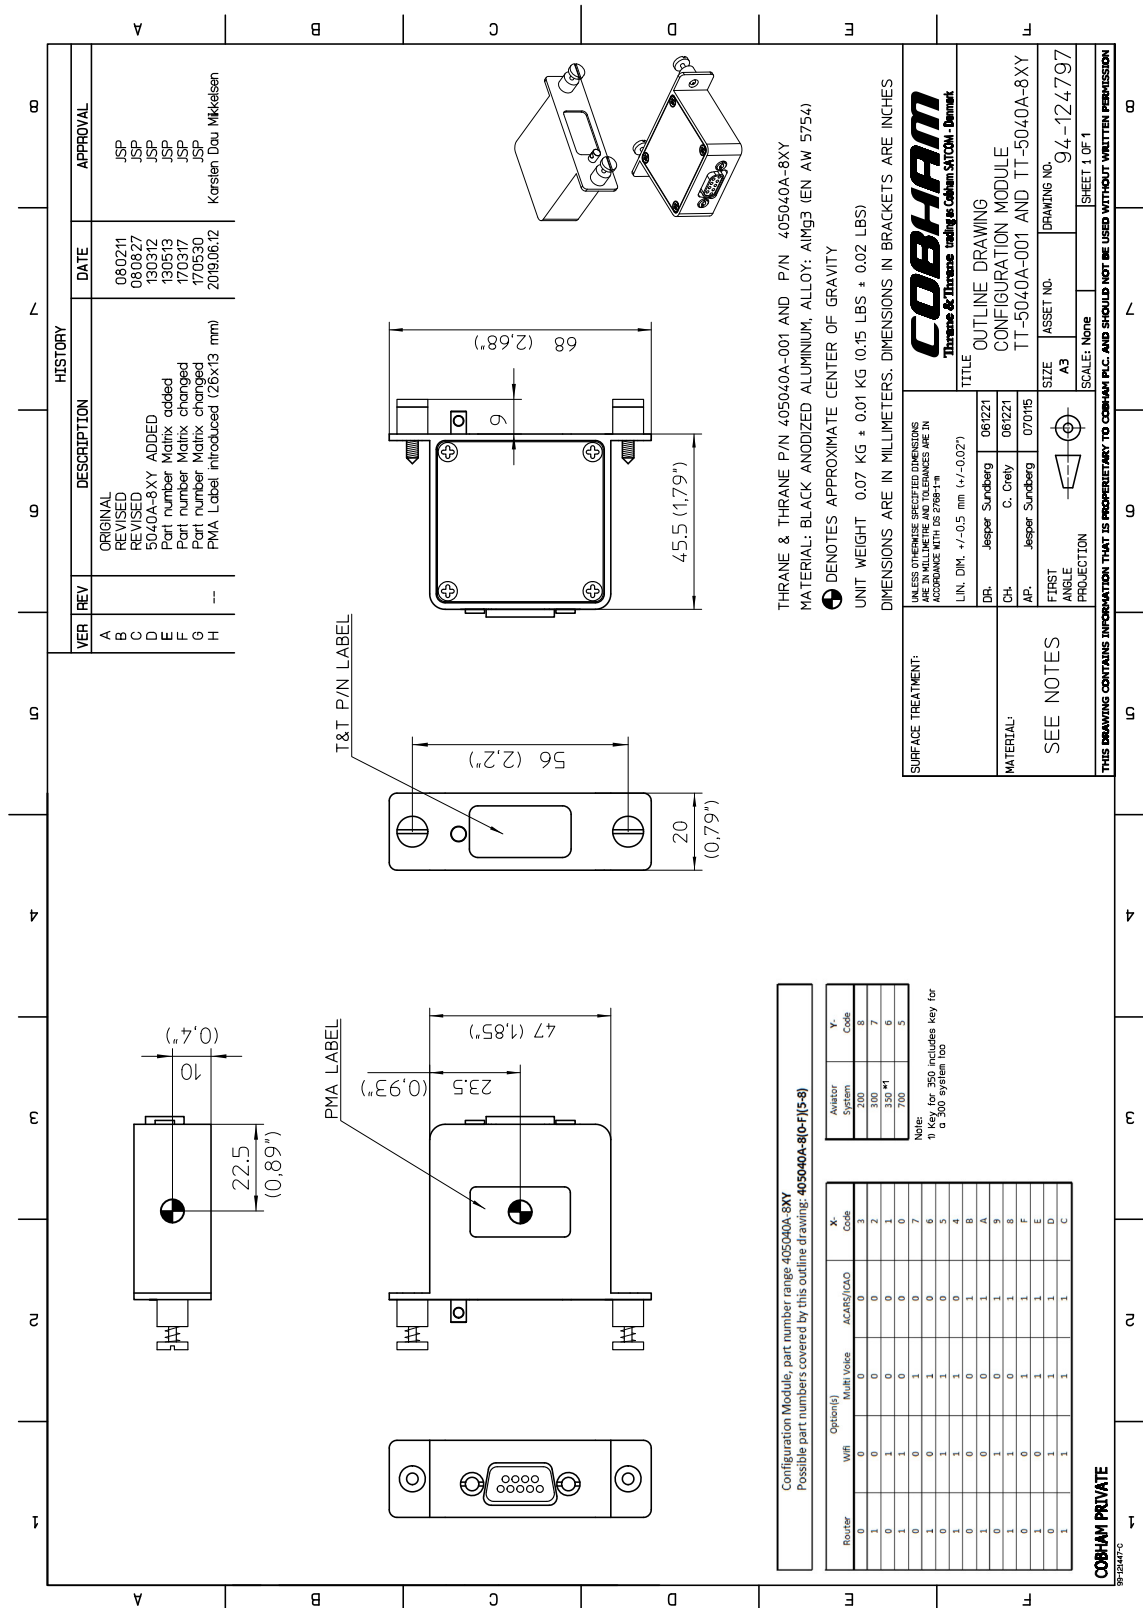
Outline drawing: TT-5040A-001/TT-5040A-8xy CM, inserted in the SBU
